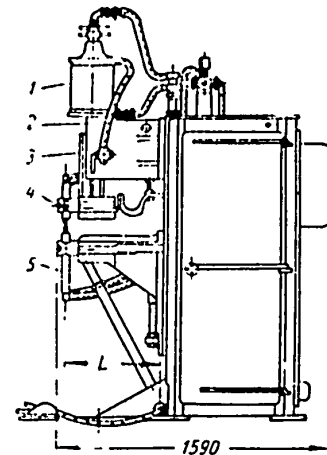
Dot-Welding Machine Type MTP-75
